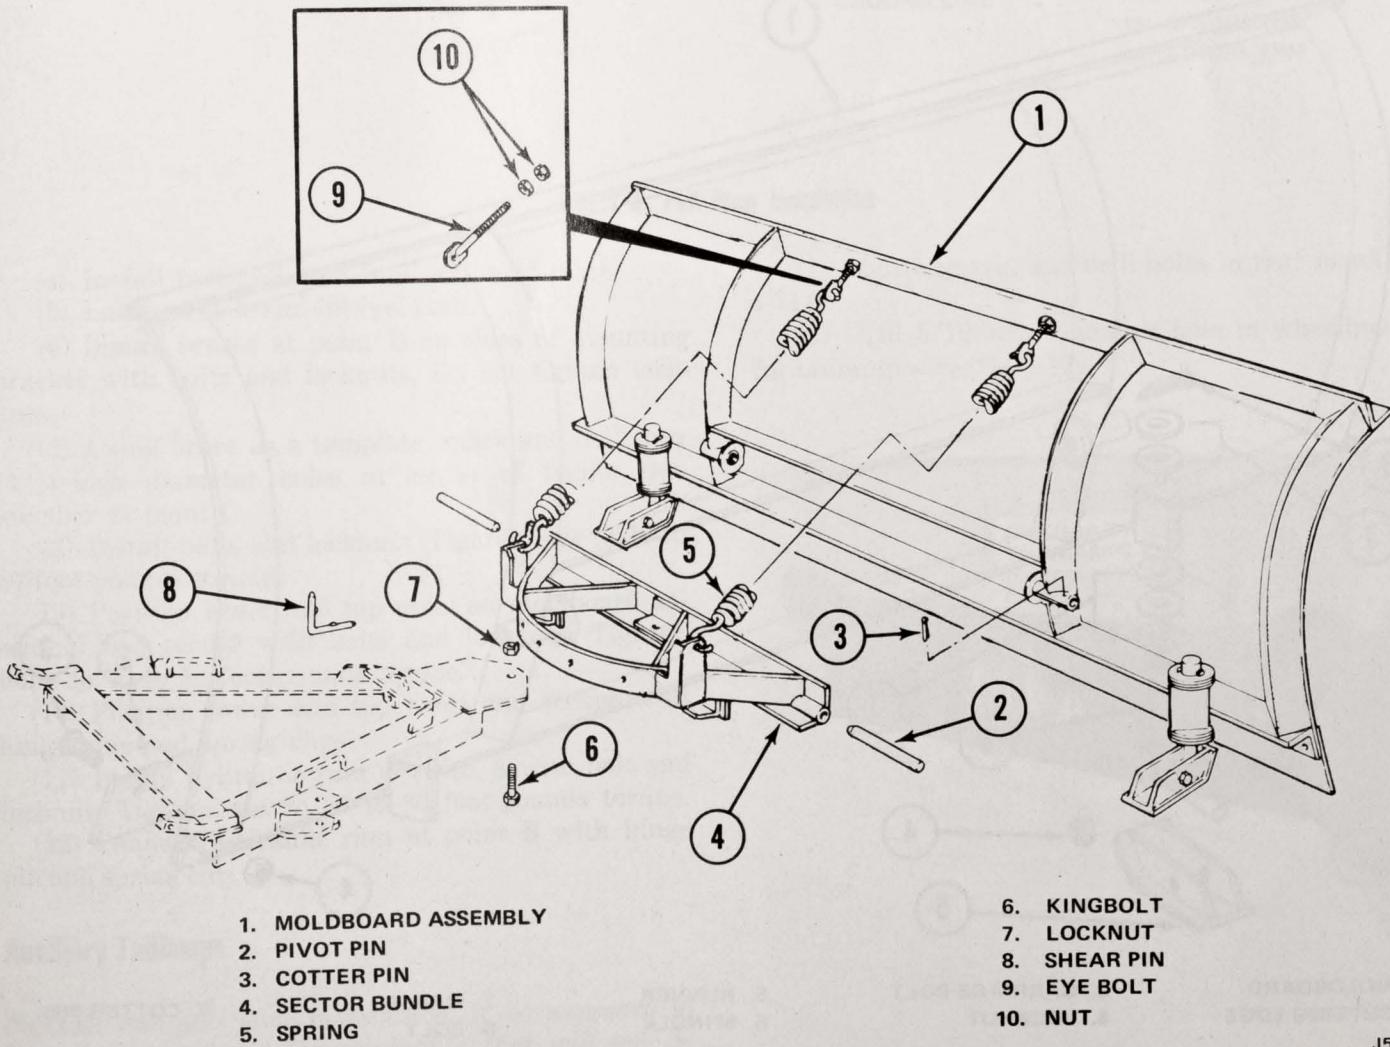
Moldboard and Sector Bundle - Components and Installation
